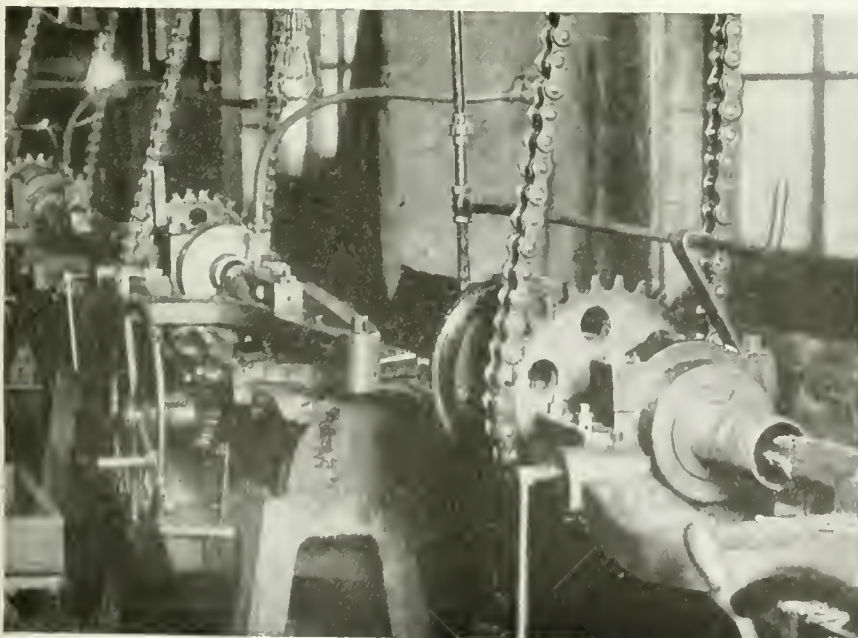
INTERIOR BORING ON "LYMBURNER" SPECIAL MACHINES EQUIPPED WITH "BALDWIN" CHAIN DRIVE.
